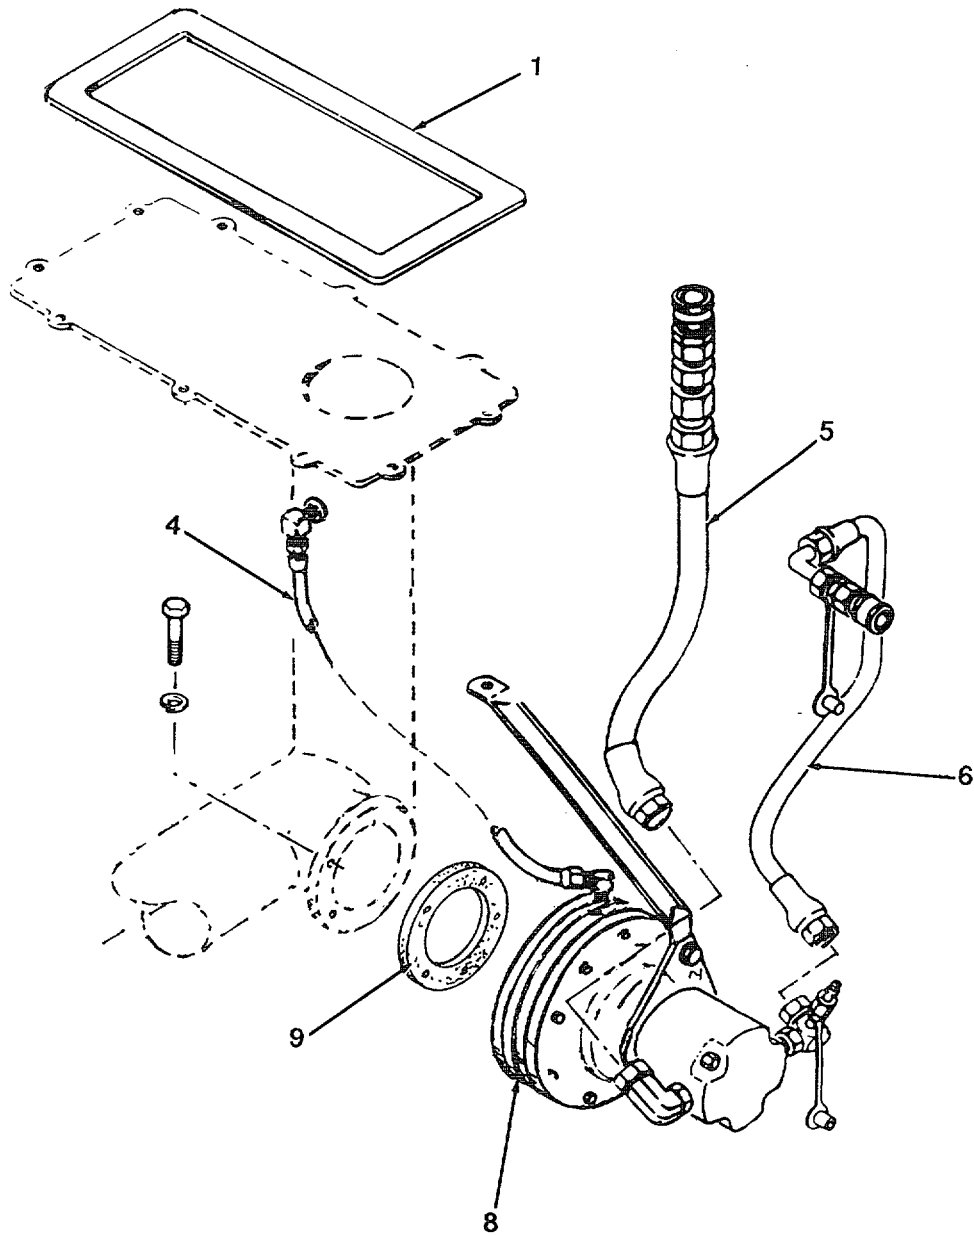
Pump and Crosstube Assembly (Sheet 2 of 2)
